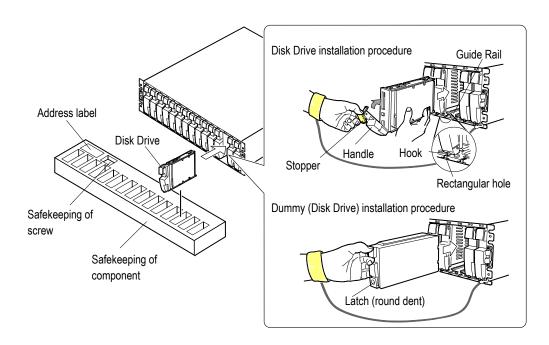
Installing the Disk Drive/Dummy (Disk Drive) (RKAKS)
